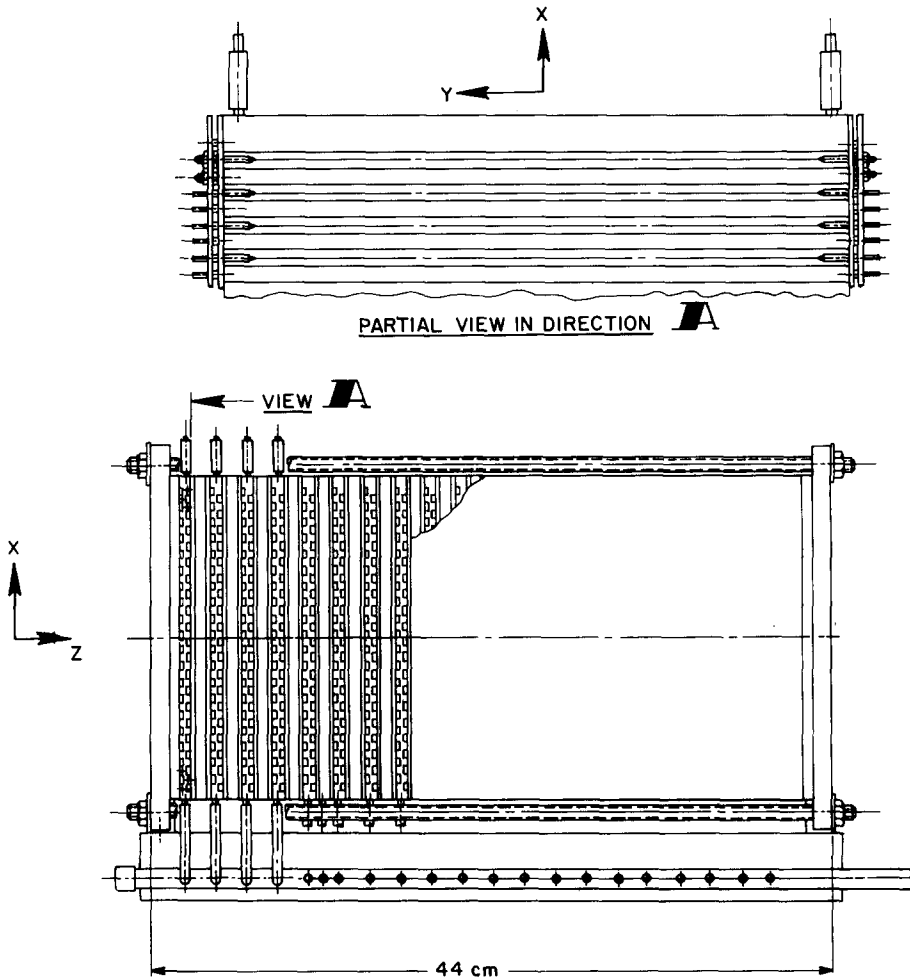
Assembly drawing of the calorimeter test module. The cross-sectional (x - y) view is $2\times$ scale.
